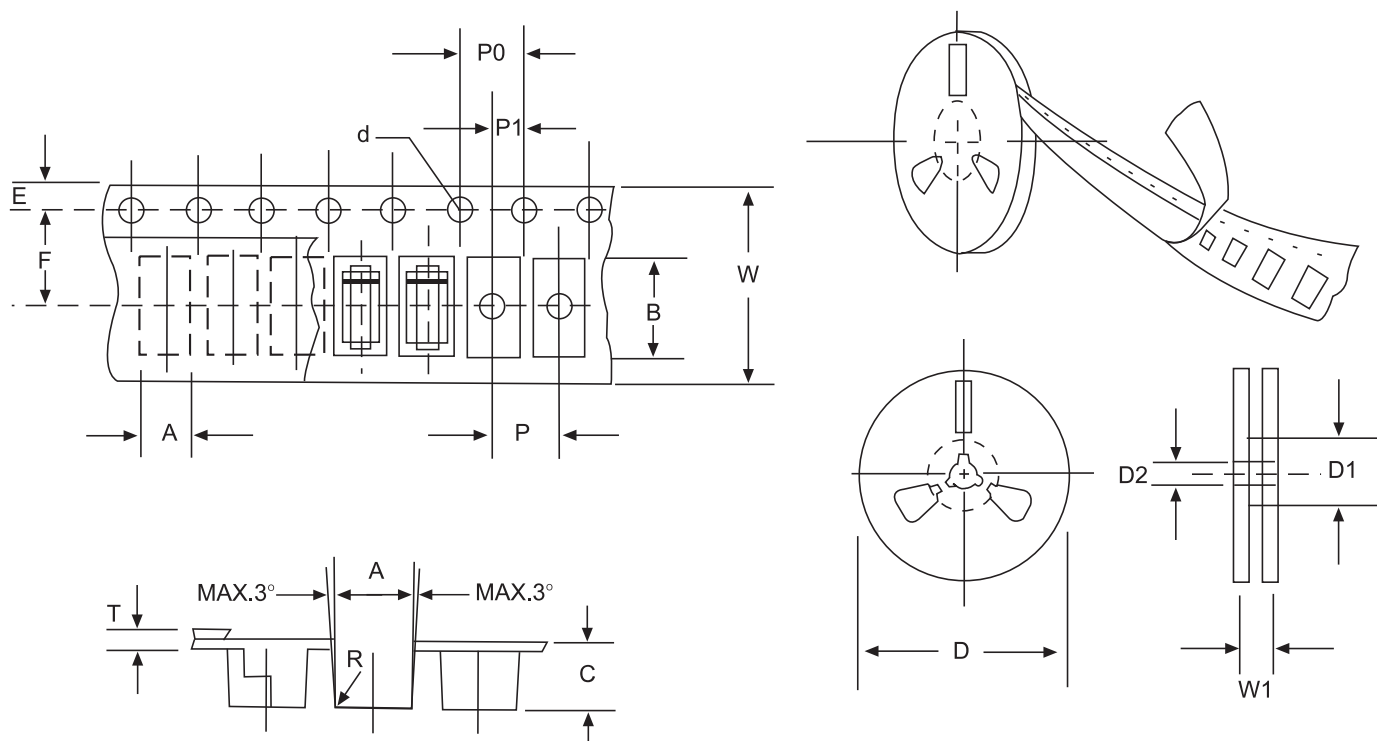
FIG : CONFIGURATION OF SURFACE MOUNTED DEVICES TAPING
